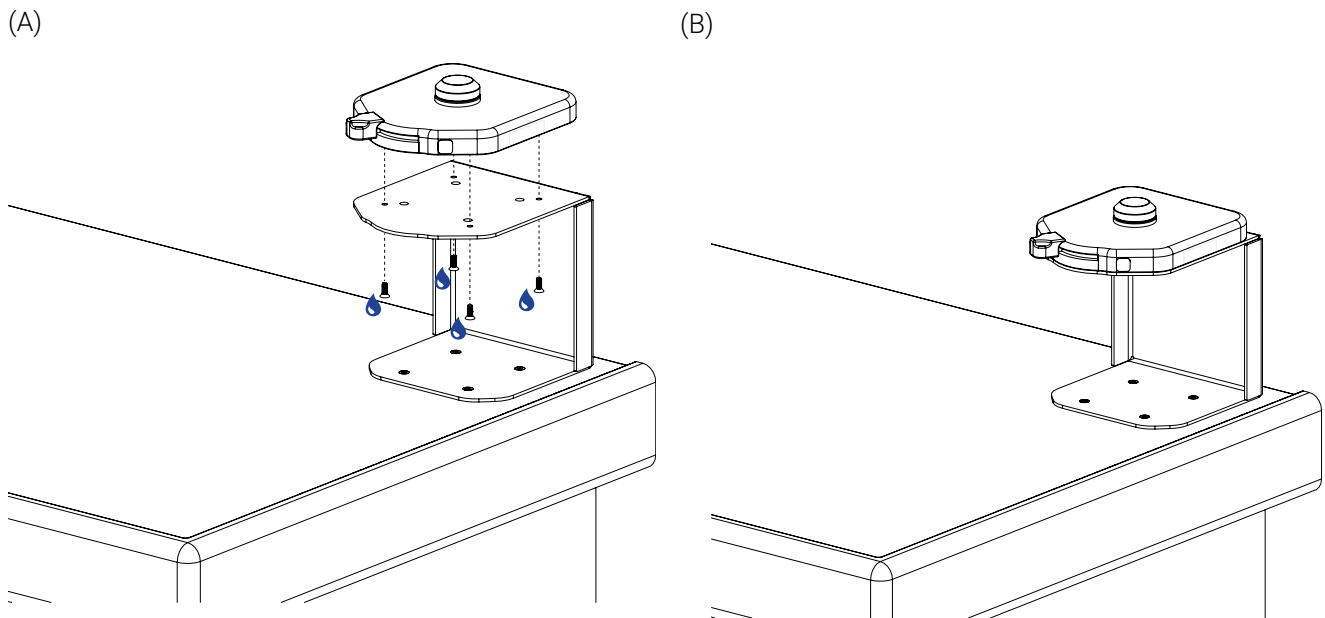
Installation of the Universal Mounting Base on the Flex Adapter Shelf
